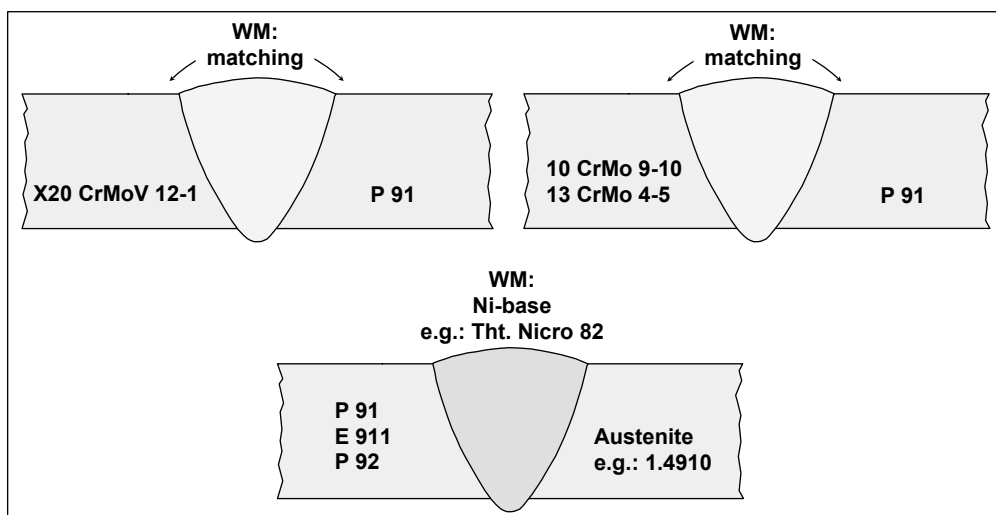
Schematic demonstration of possible filler metal choice for dissimilar welds between
